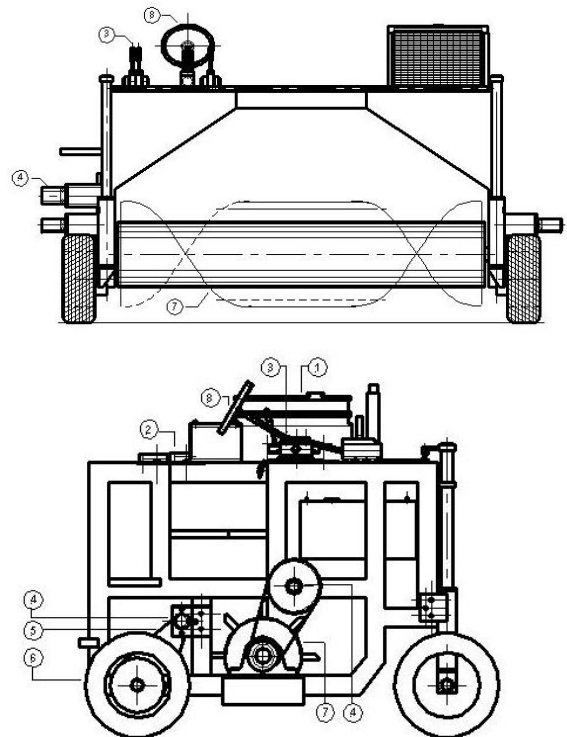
Front view (top) and side view (bottom) showing (1) engine, (2) hydraulic pump, (3) directional control valve, (4) motor, (5) chain, (6) driven wheel, (7) rotor, (8) steer
